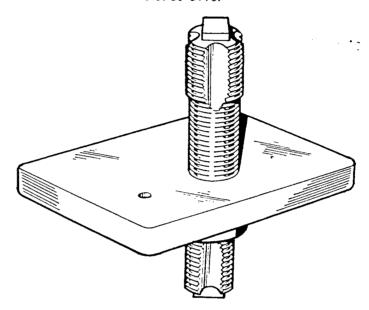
Clutch nut screwdriver No. 61–3700.
